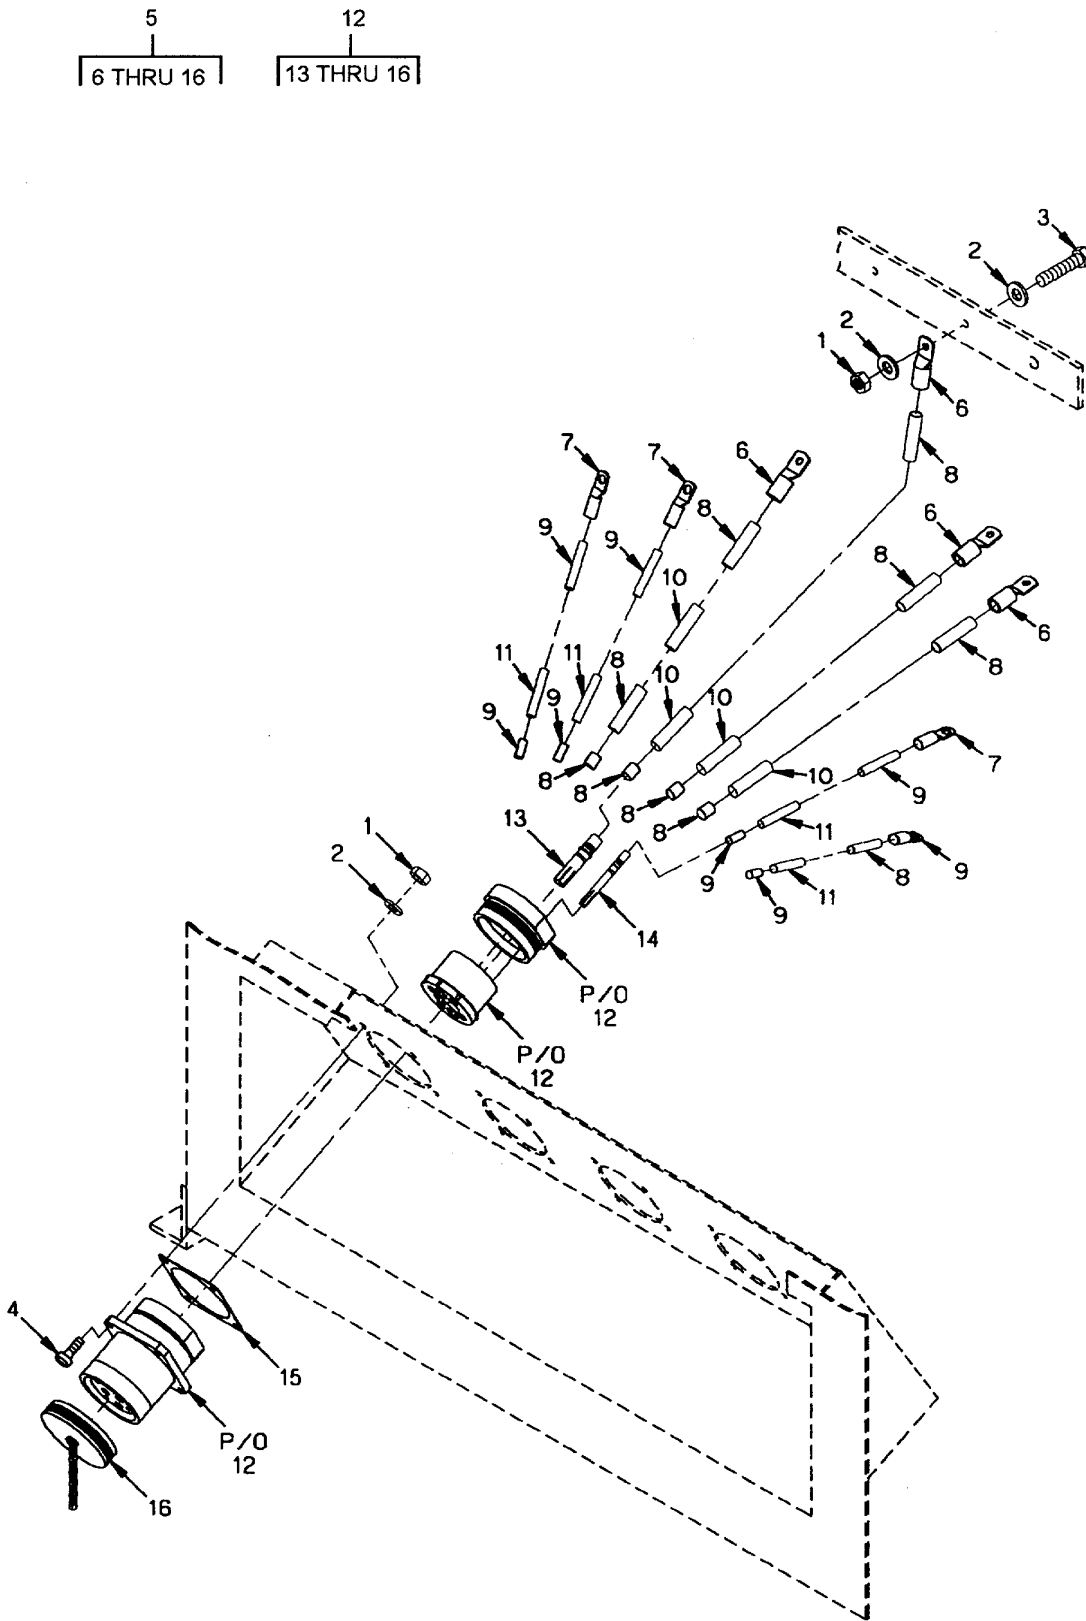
Wiring Harness, A1W6 Through A1W9 (Sheet 1 of 2)
